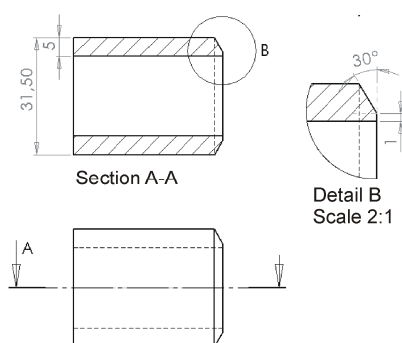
Diagram showing preparation of the joint for hybrid welding
